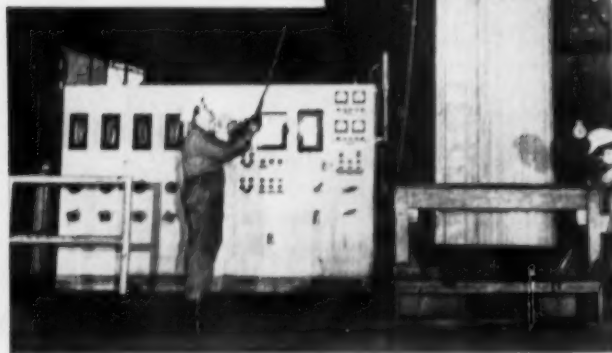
Dummy Block of Appropriate Magnesium Alloy Being Lowered Into Position to Start Continuous Casting of New Ingot. Control panel for casting machine at left. Casting pot is at right (not shown)
